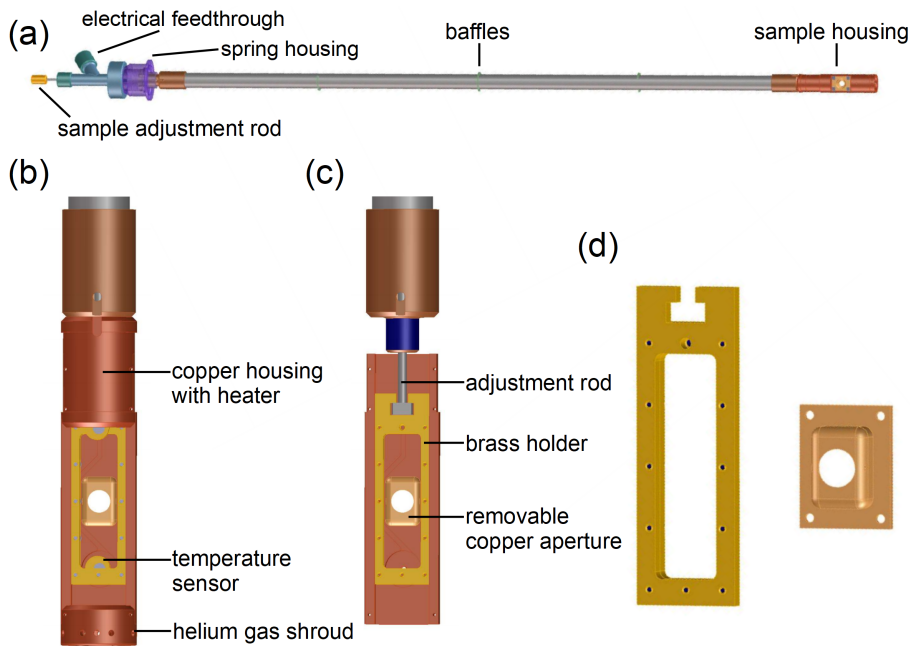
A schematic of the custom-built cryostat insert used in this work. (a) An overview of the full sample stick. A spring at the top of the stick is used to ensure contact between the bottom of the stick and bottom of the cryostat sample chamber at all temperatures. (b) A view of the sample housing. The housing was machined from large pieces of copper in order to provide temperature stability. A temperature sensor was mounted in a small groove on this housing beneath the brass sample frame. (c) A cutaway schematic of the movement mechanism for the brass sample holder. (d) The brass frame and interchangeable brass aperture.
